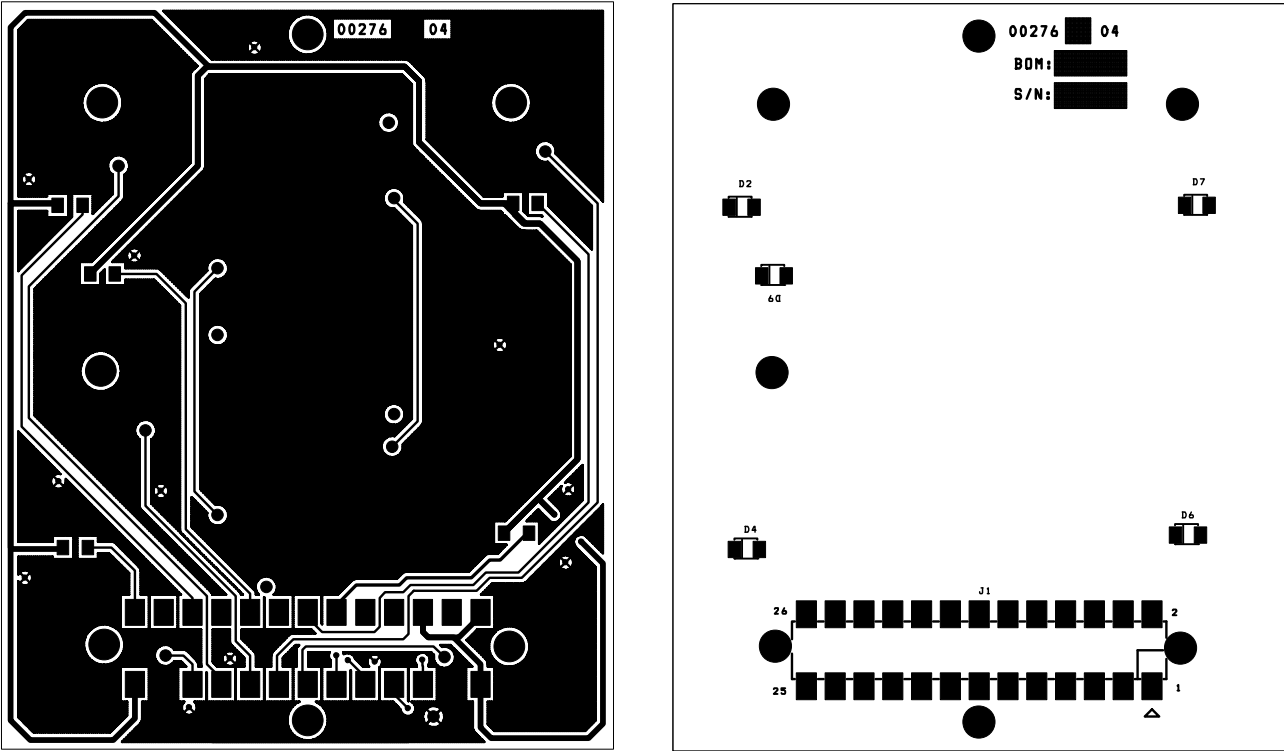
Slider Touch Panel, Parts Placement and PCB Layout, Bottom Side
